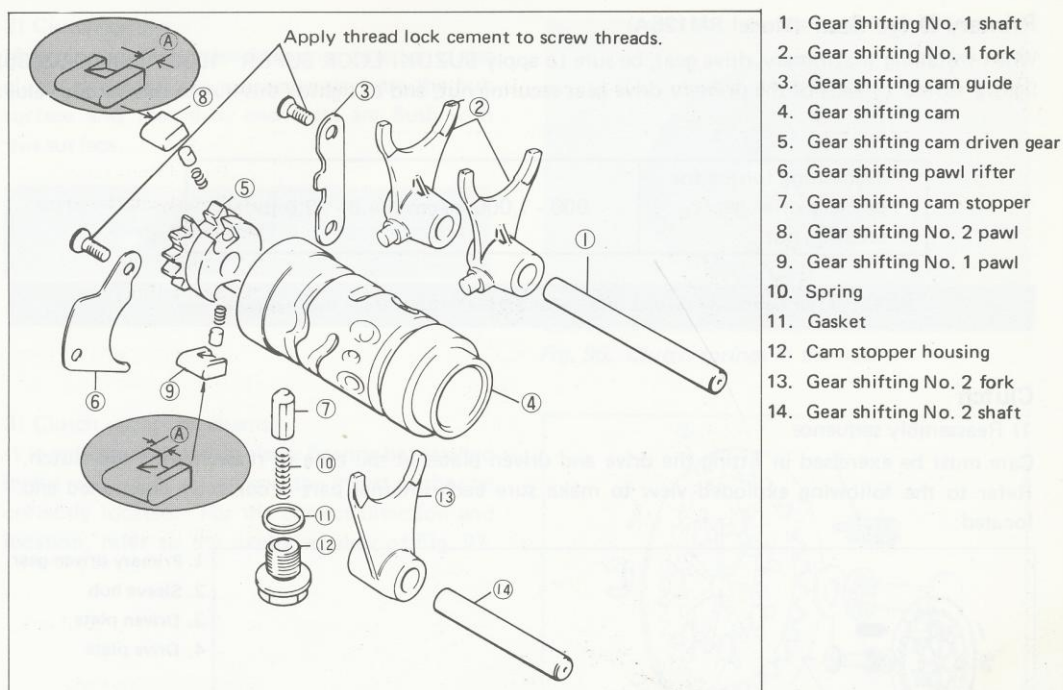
Exploded view of shifting mechanism (Model RM125A)
